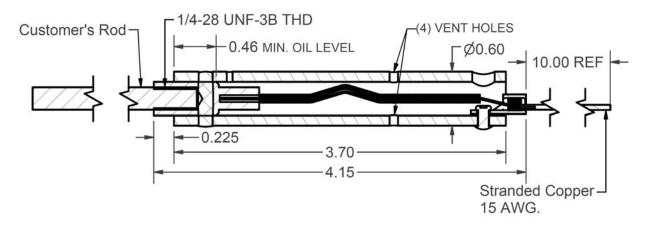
Outline drawing of the 8.3kV/15kV Oil-Immersed Weak Link Bushing Mounted Fuses
